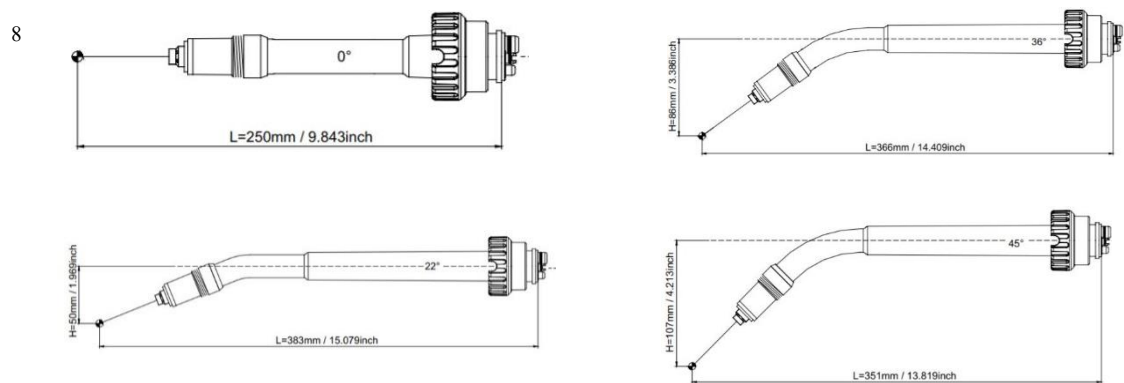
Illustration of the Fronius Welding Torch.
